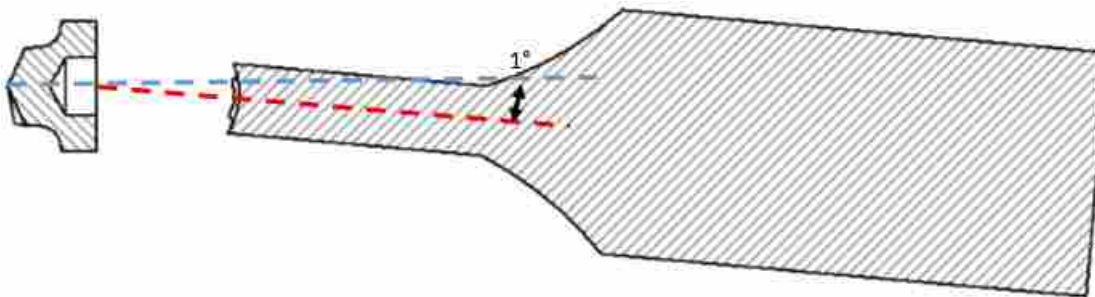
Relationship of the Torx Broach Cutter to a Predrilled Bit Blank
